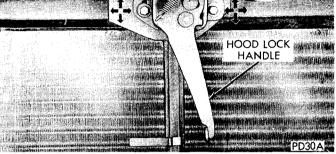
Hood Lock Striker Adjustment (D-W 1-2-3)
